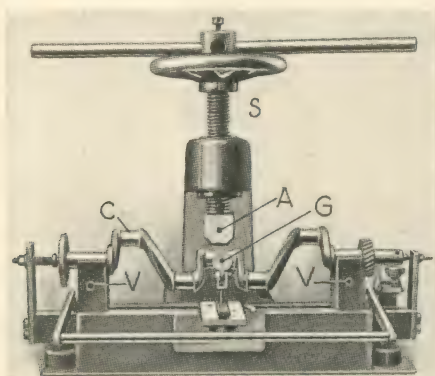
COMBINED STRAIGHTENING PRESS AND GAUGE
